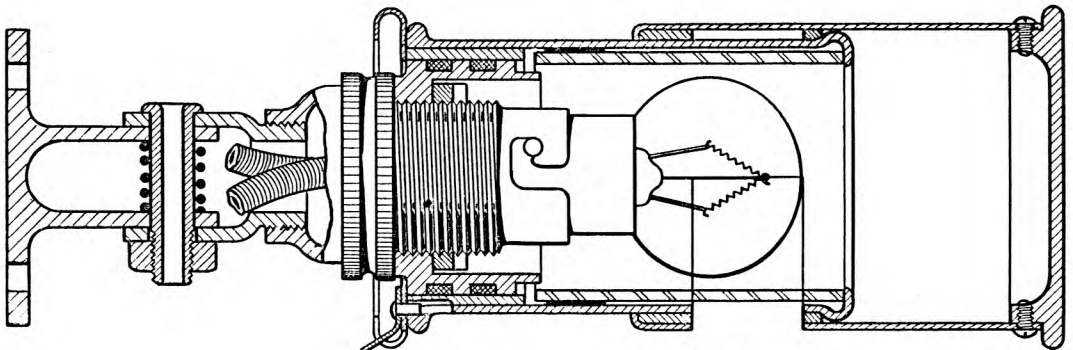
Cockpit lamp, Mk. II, sectional view
